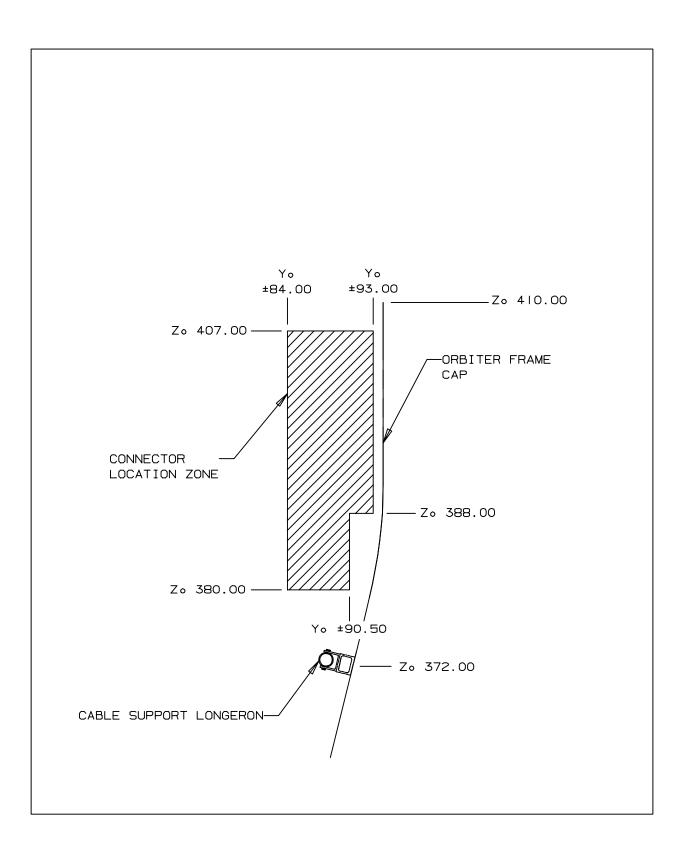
PAYLOAD CONNECTOR LOCATION AND CABLE CLAMPING
